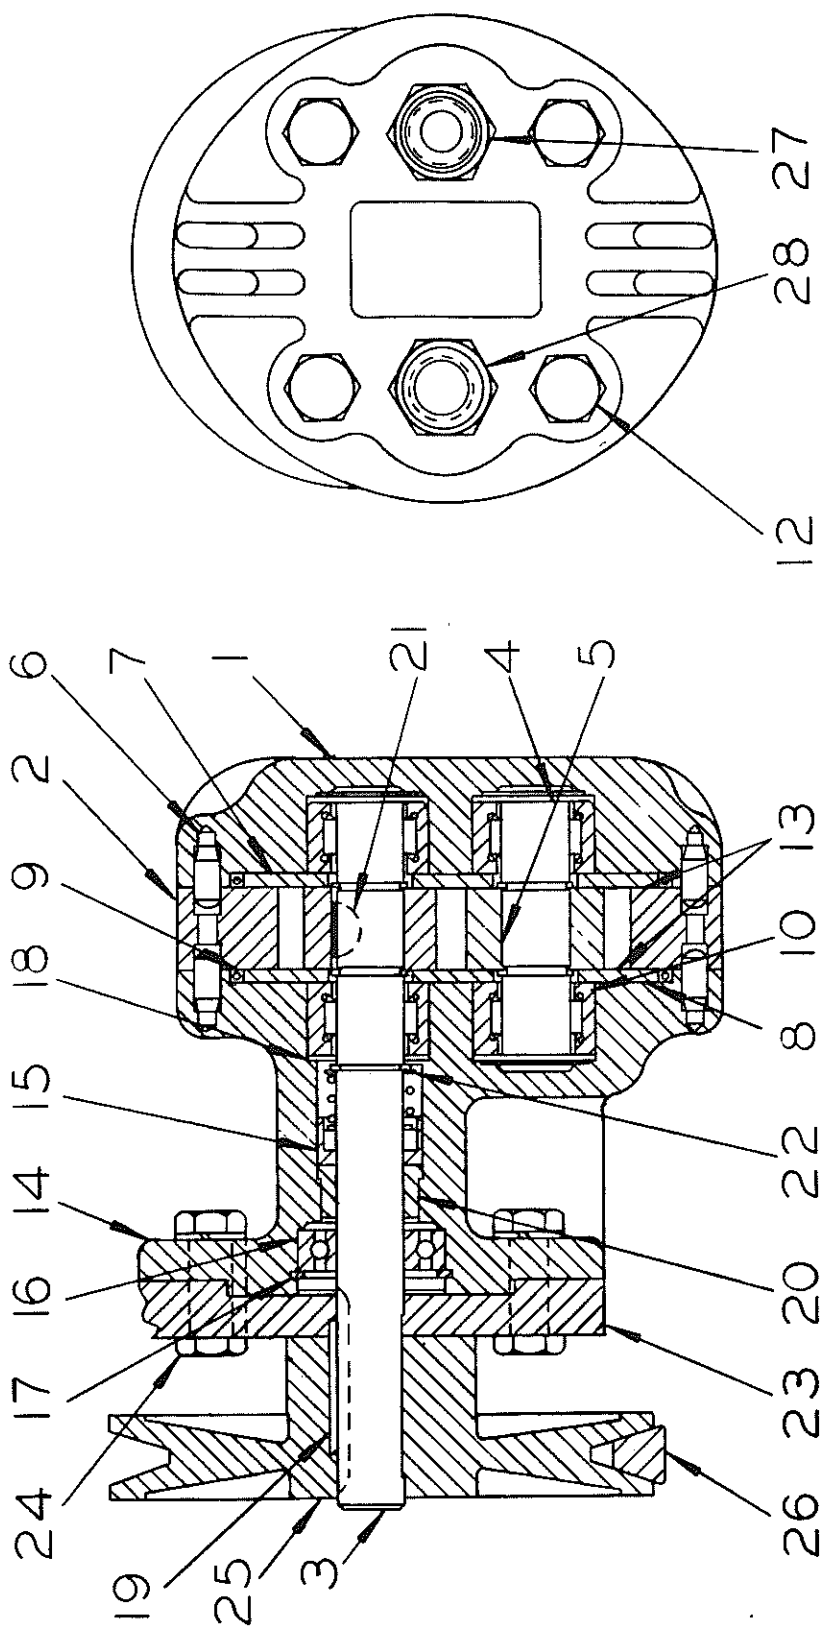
HYDRAULIC POWER STEERING PUMP
